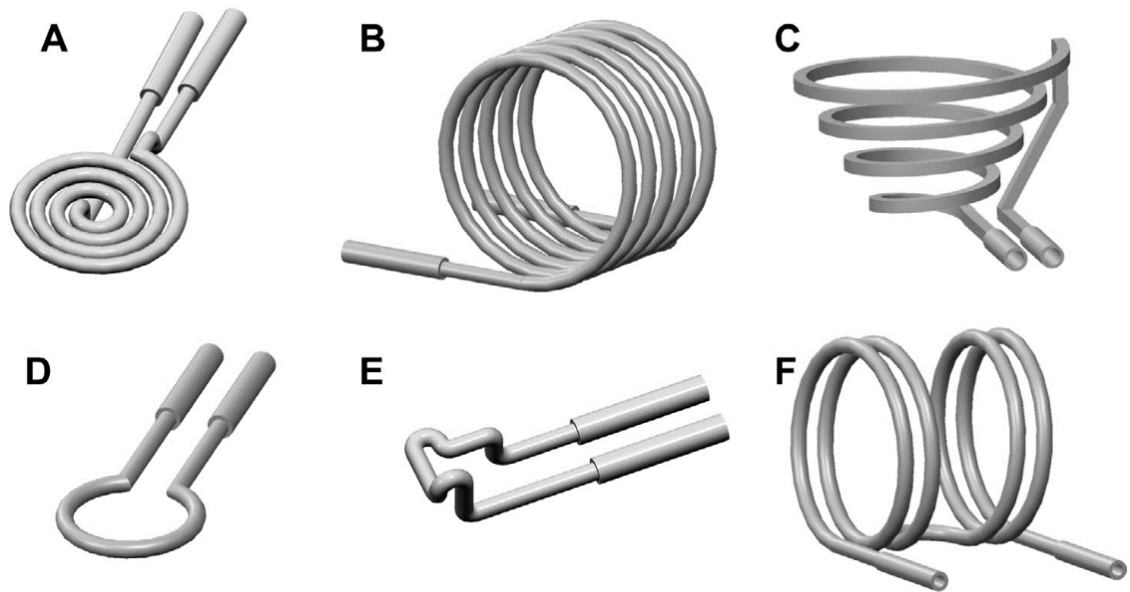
Common coil designs applied for the inductive heating of composites (A) pancake coil, (B) helical coil, (C) conical coil, (D) single-turn coil, (E) irregular coil adapted to the workpiece shape, (F) double-helical coil (Helmholtz coil) [282].
